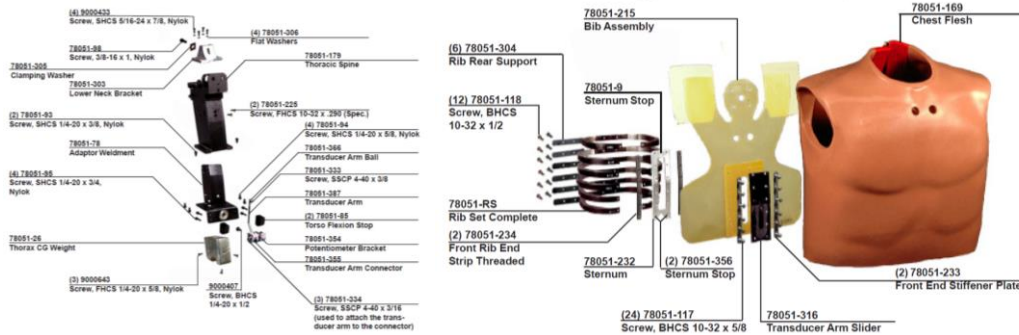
Left: Spine and chest deflection transducer. Right: Torso assembly [46]
